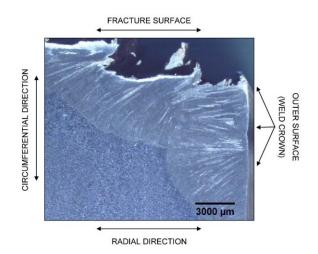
, Metallographic cross section of fracture surface running through the weld
